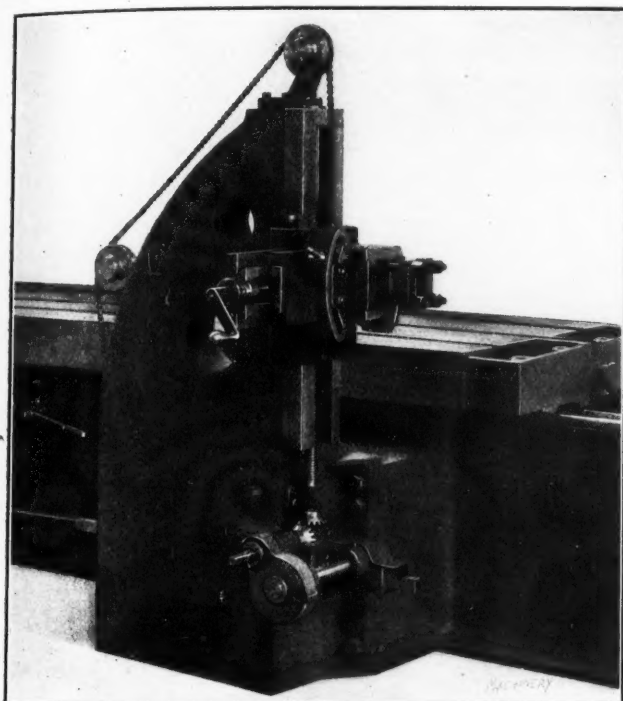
Auxiliary Housing of Planer shown in Fig. 1
